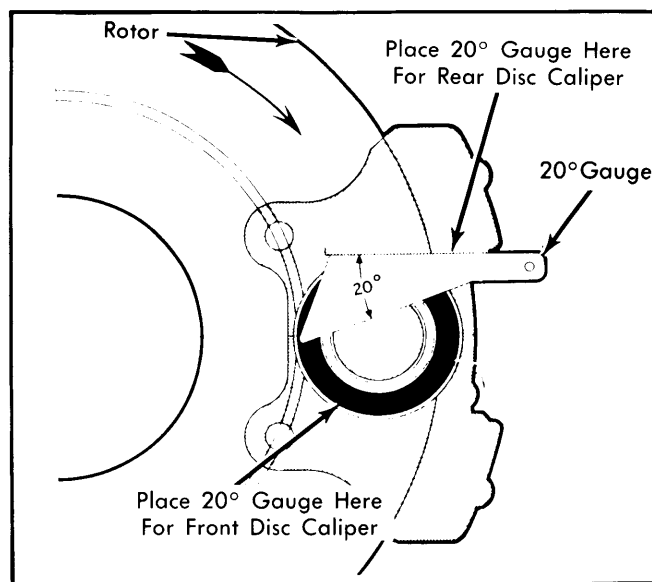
Positioning Caliper Piston Using 20° Gauge
